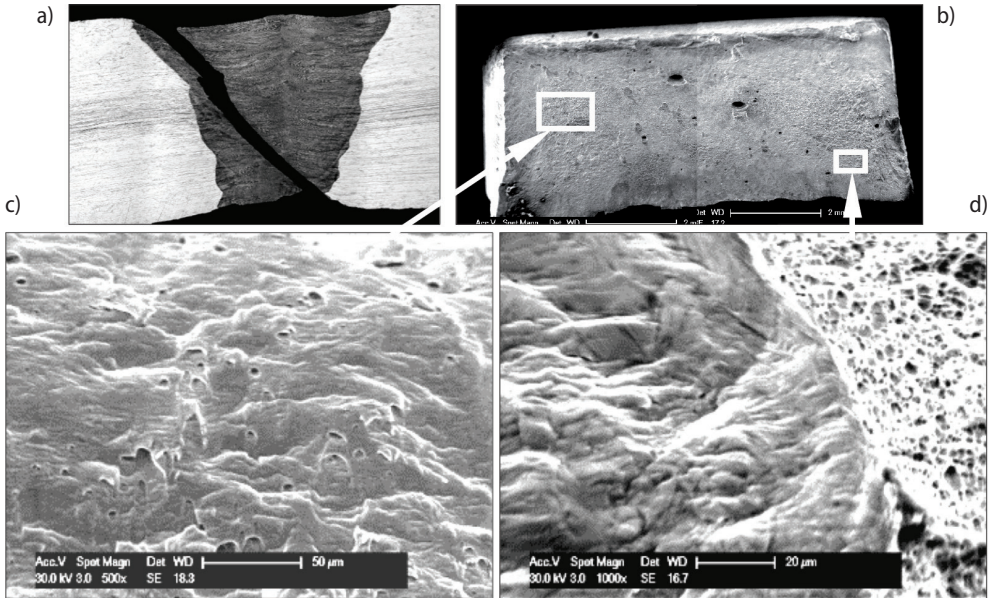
Transverse metallographic of static fractures of the laser beam welded samples (a) and microstructure of laser-welded samples after static tensile test (b), (c), (d)
